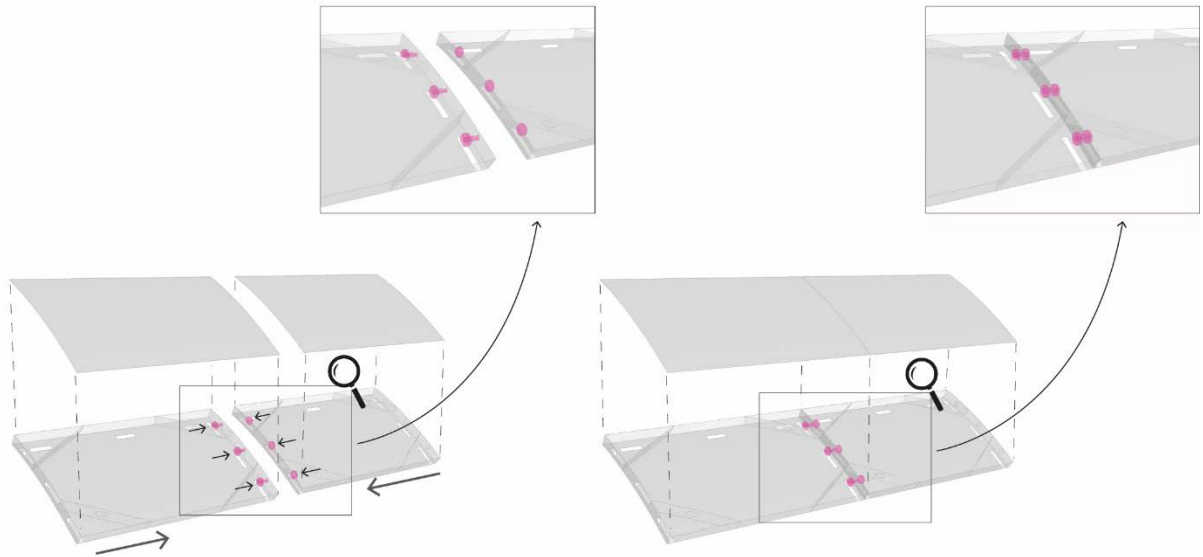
Visualization of assembly proposal with rivets or nuts and bolts. It should be noted that either the top- or the bottom sheet should include openings in order to assemble the panels.
